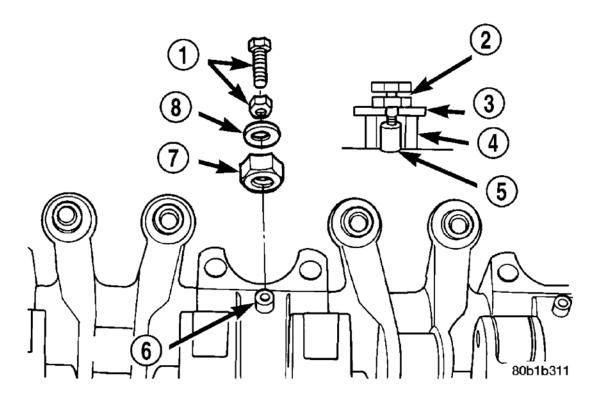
Rocker Arms & Shaft - Disassembly Courtesy of CHRYSLER LLC
